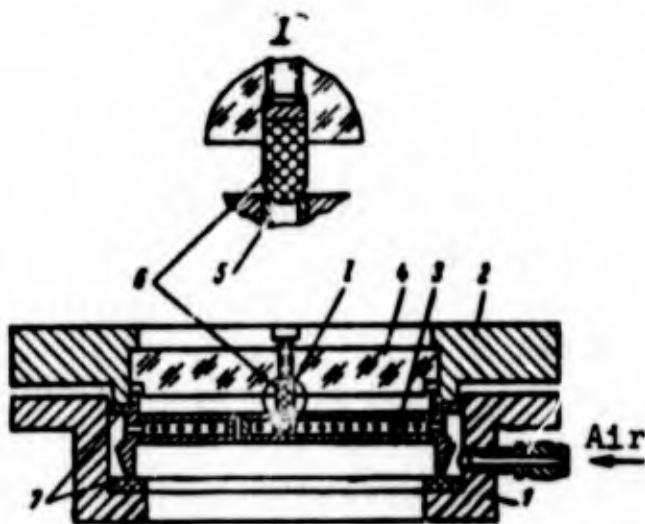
Fixture for pneumatic tests of block of injectors. 1) casing; 2) cover; 3) block of injectors; 4) organic glass; 5) injector; 6) rubber plug; 7) rubber seal.
